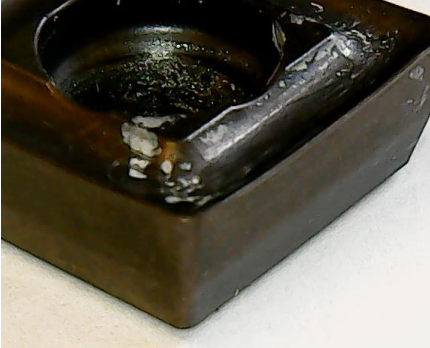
Cast Iron – Tools – LN2 – Drilling.
